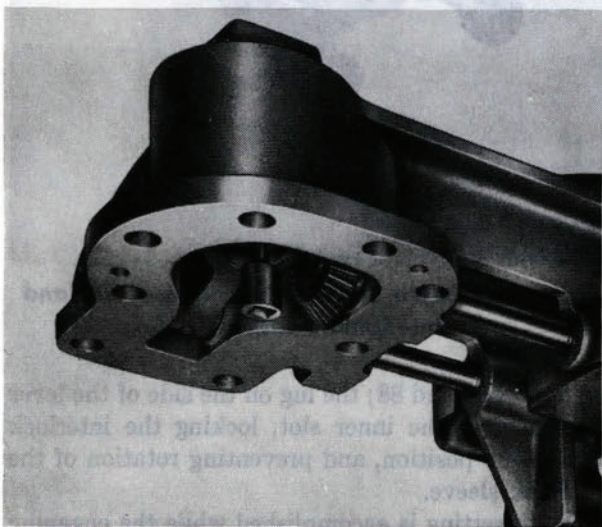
Depth Setting Mechanism—Bottom View—Spindle OUT.
